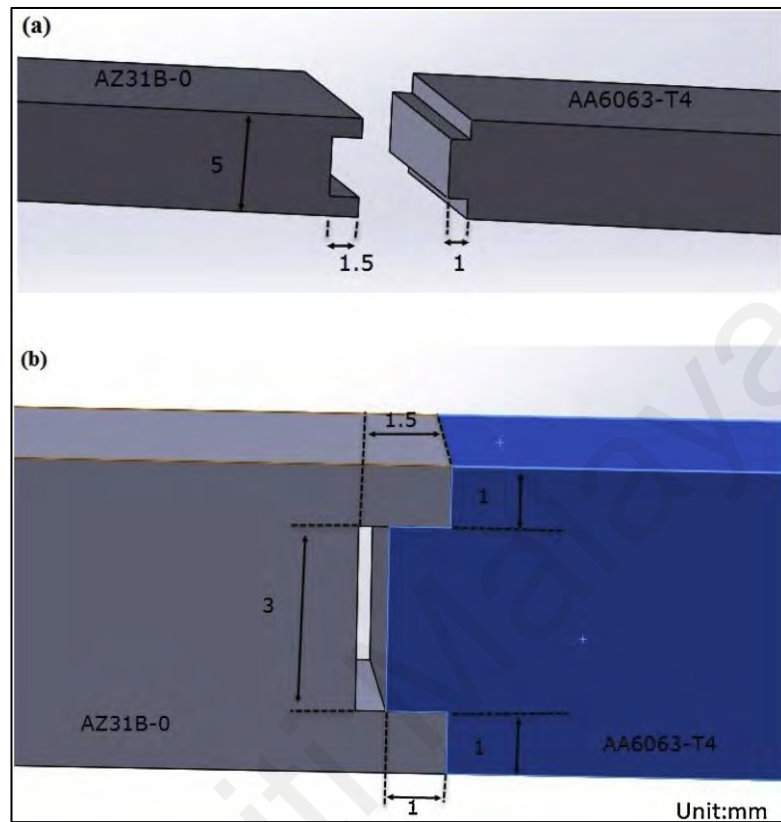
Novel groove design to embed nanoparticles: (a) initial workpieces (b) after interlocking (Sharifi et al., 2019)
